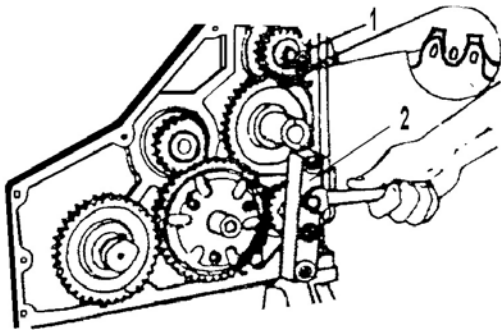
Arrangement of gear train (tooth- mesh- makes must be lined up) and dismantling of balancing shaft gear by means of a puller
